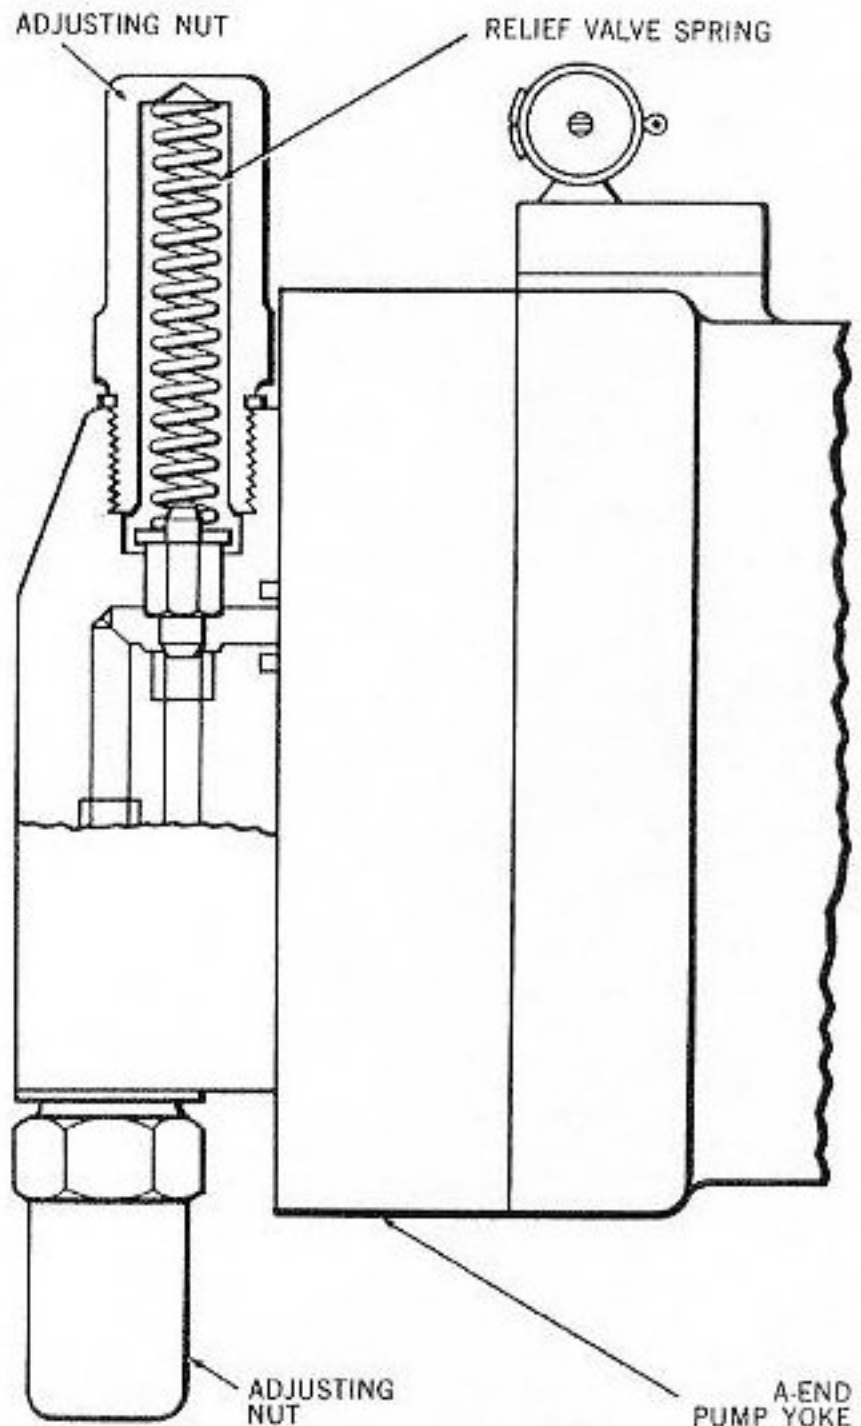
Projectile Ring Safety Relief Valve Adjustment
